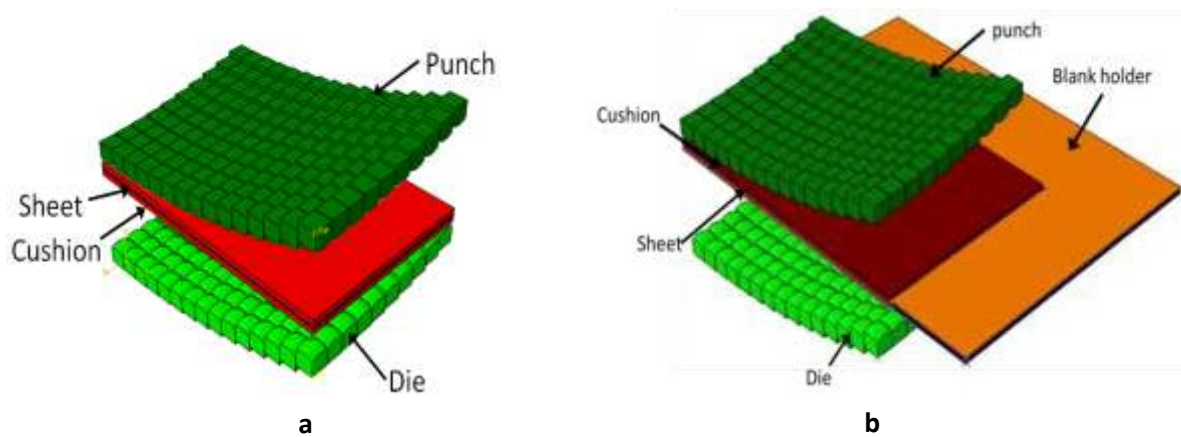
3-D FE model a) without blank holder b) with blank holder
